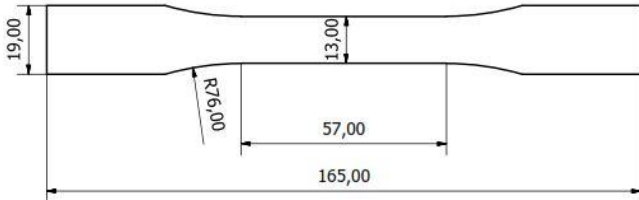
ASTM standard test specimen D638 2D sketch (dimensions in mm).
